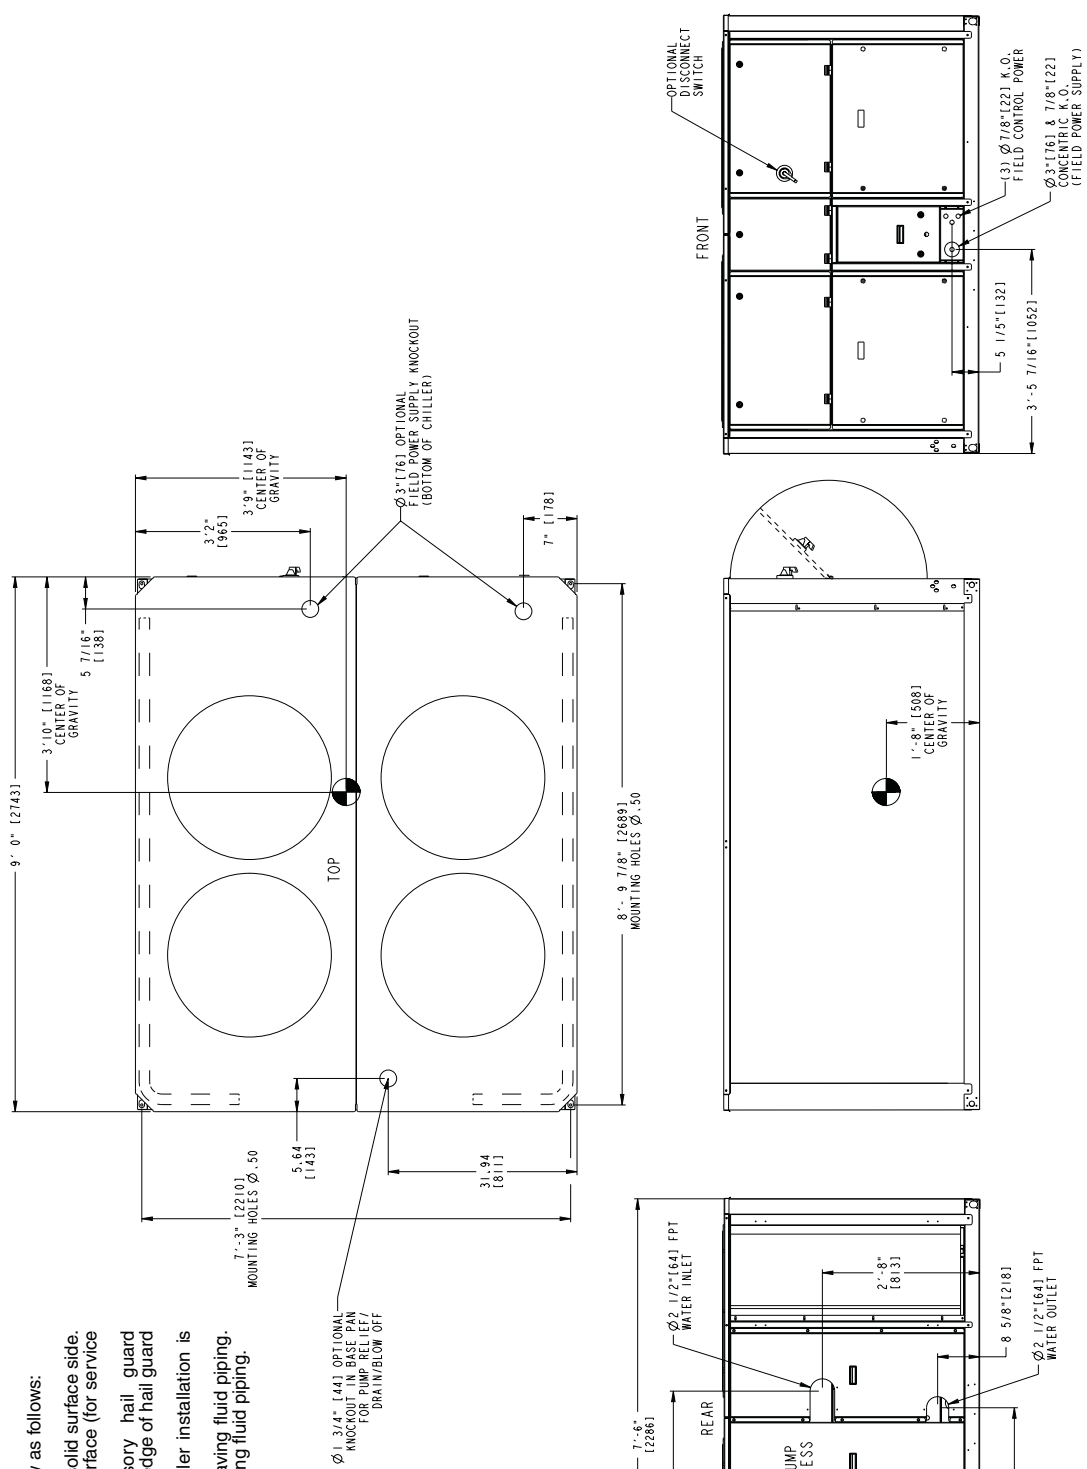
Dimensions — 30RA055 AquaSnap™ Chiller
